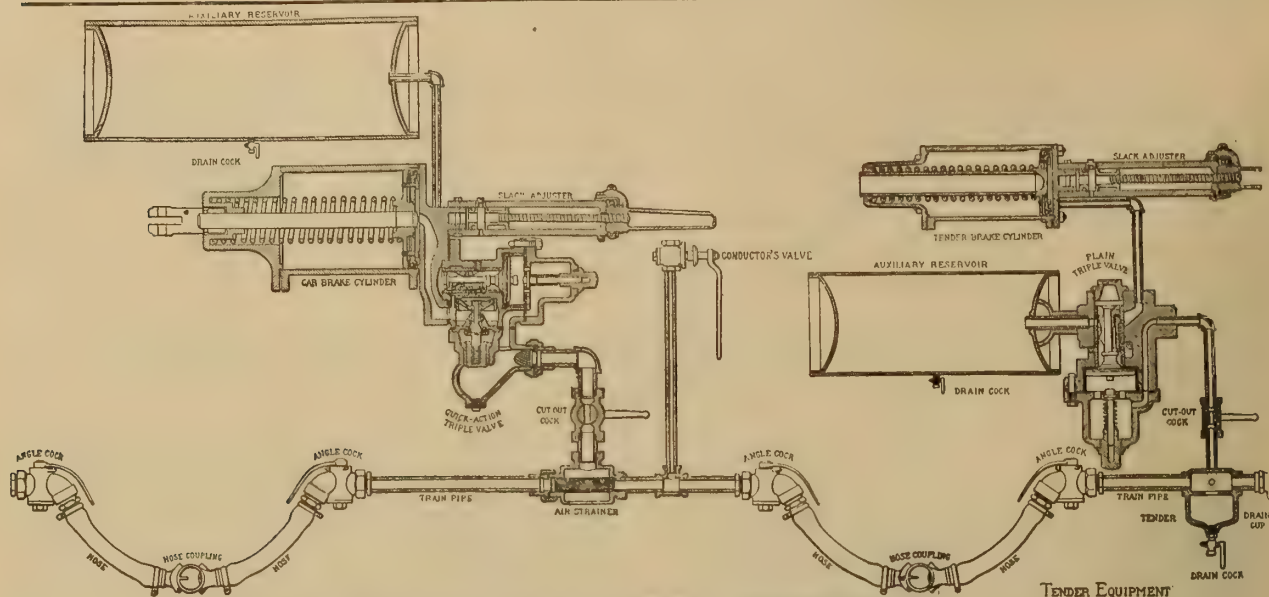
SECTIONAL VIEW, SHOWING GENERAL ARRANGEMENT OF APPARATUS.
